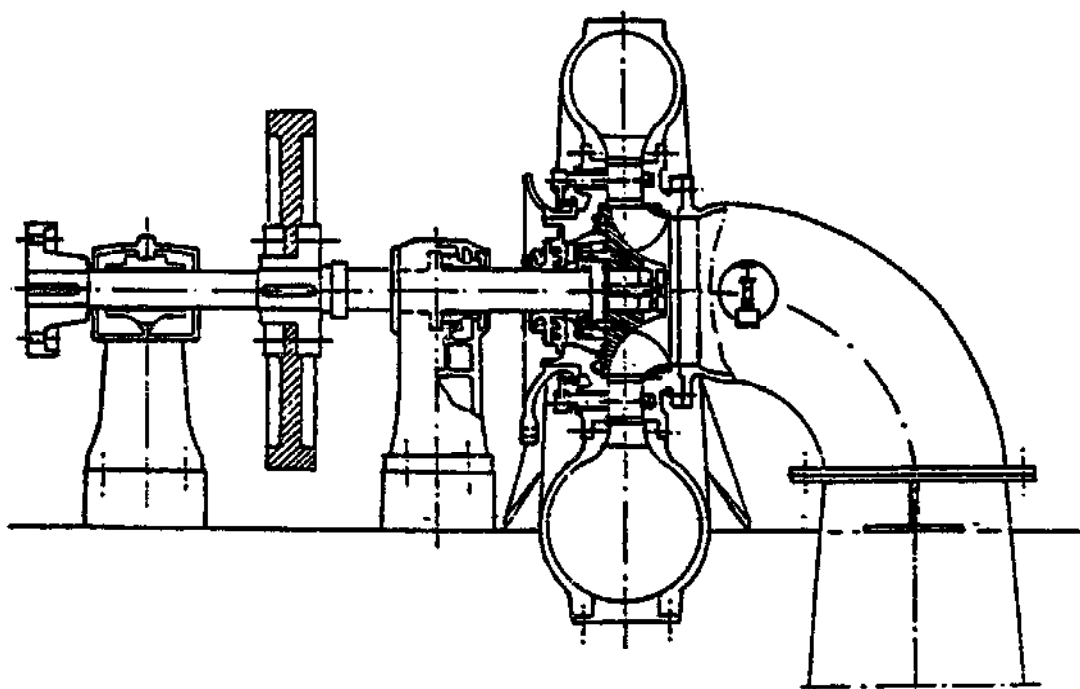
Francis turbine horizontal shaft; N_s 150; size 33"
